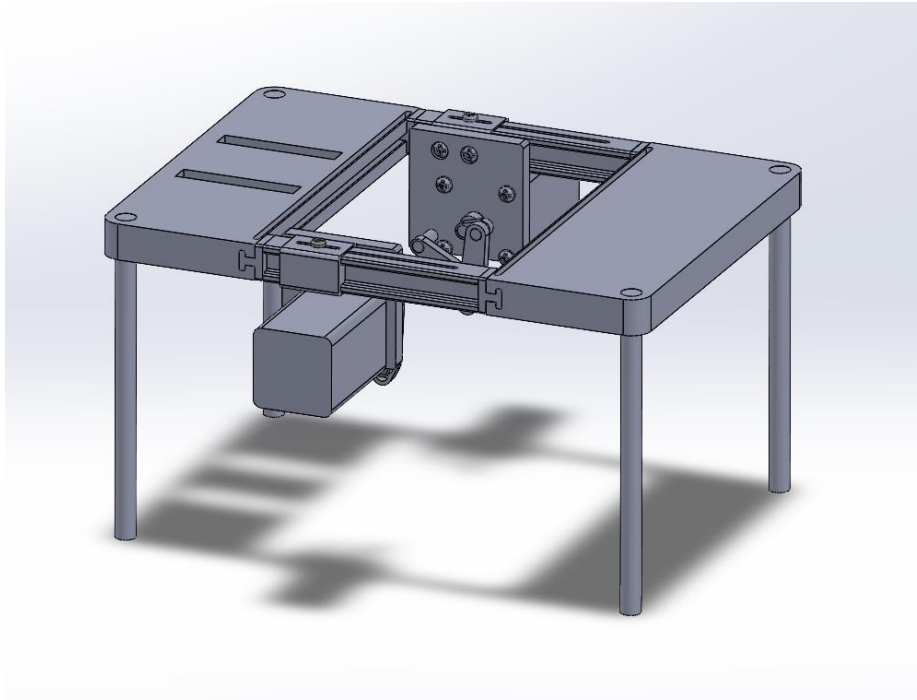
Isometric view of the 3D model of the adjustable mechanism.
